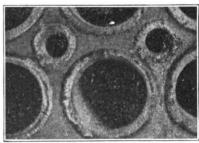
Electrically Welded Boiler Tubes Courtesy of "Railway Master Mechanic"
